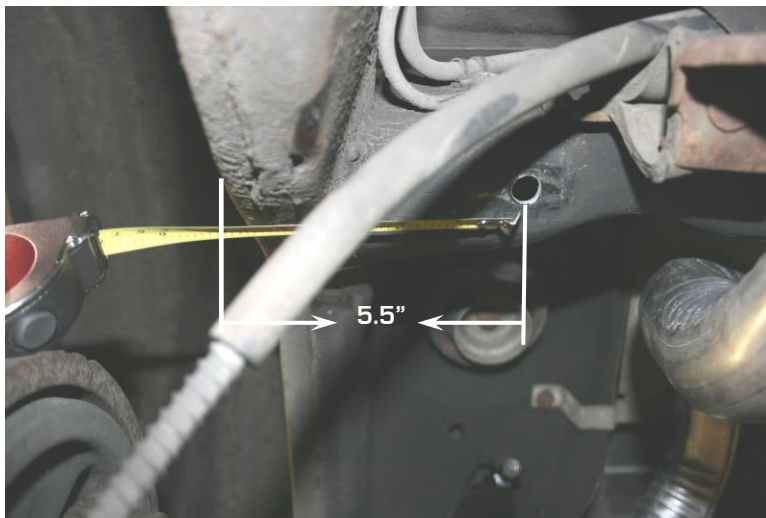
Locating the Upper Link Mount Hole (Driver Side Shown)
